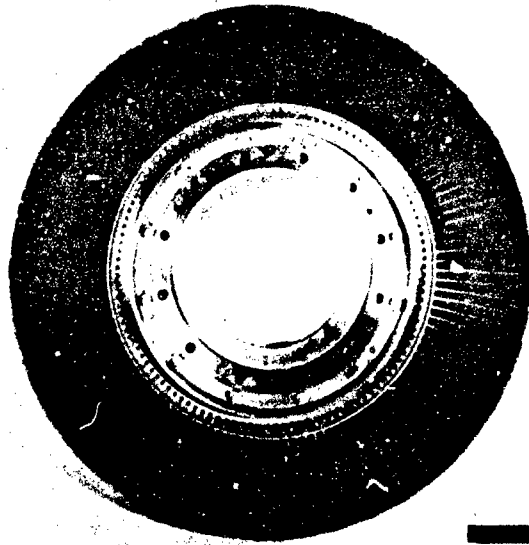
Build I, Full Front View of Second Rotor Assembly (XPN-18907)
